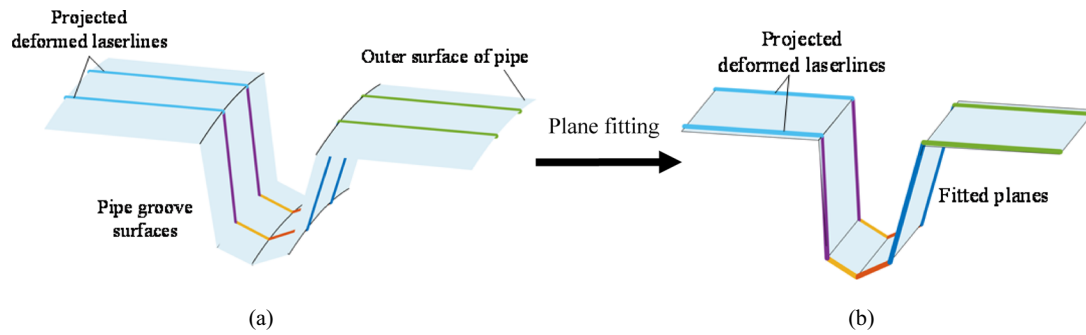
The model schematic diagrams of plane fitting instead of the local curved surface: (a) Local pipe outer surfaces and its groove surfaces and 3D deformed laser lines; (b) Local plane fitting for segmented 3D deformed laser lines
